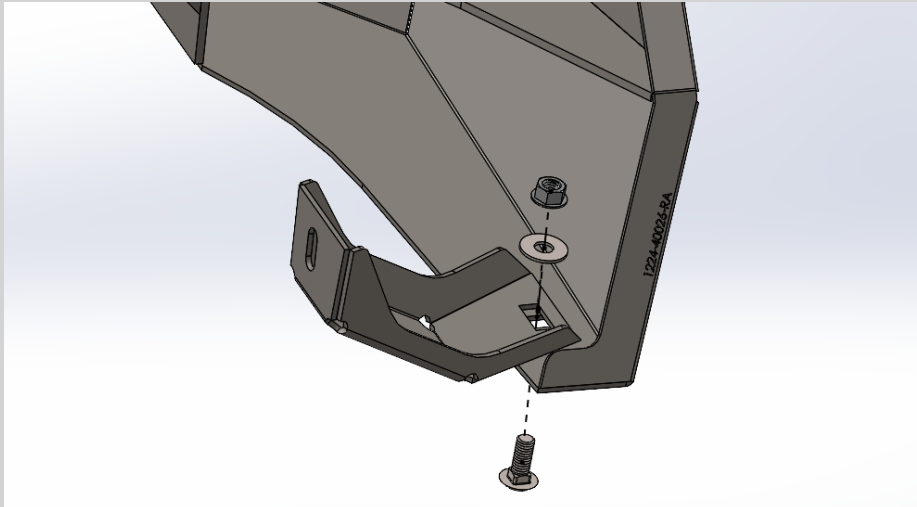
Front support bracket installed with 3/8" carriage bolt, washer, and flange nut.
